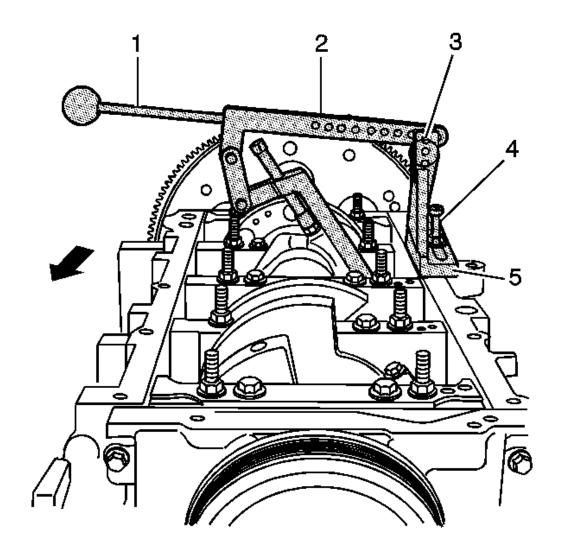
View Of Special Tool Installed On Engine Block Courtesy of GENERAL MOTORS CORP.
